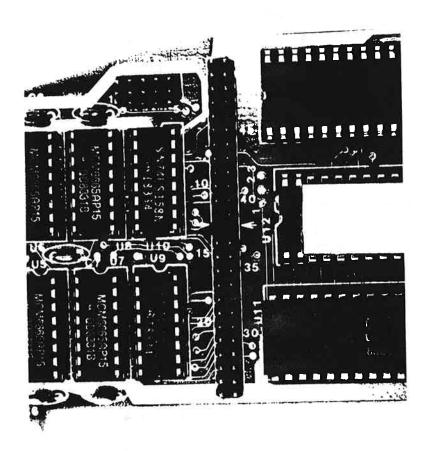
EXPANSION BOARD SHOWING LOCATION OF JUMPER
